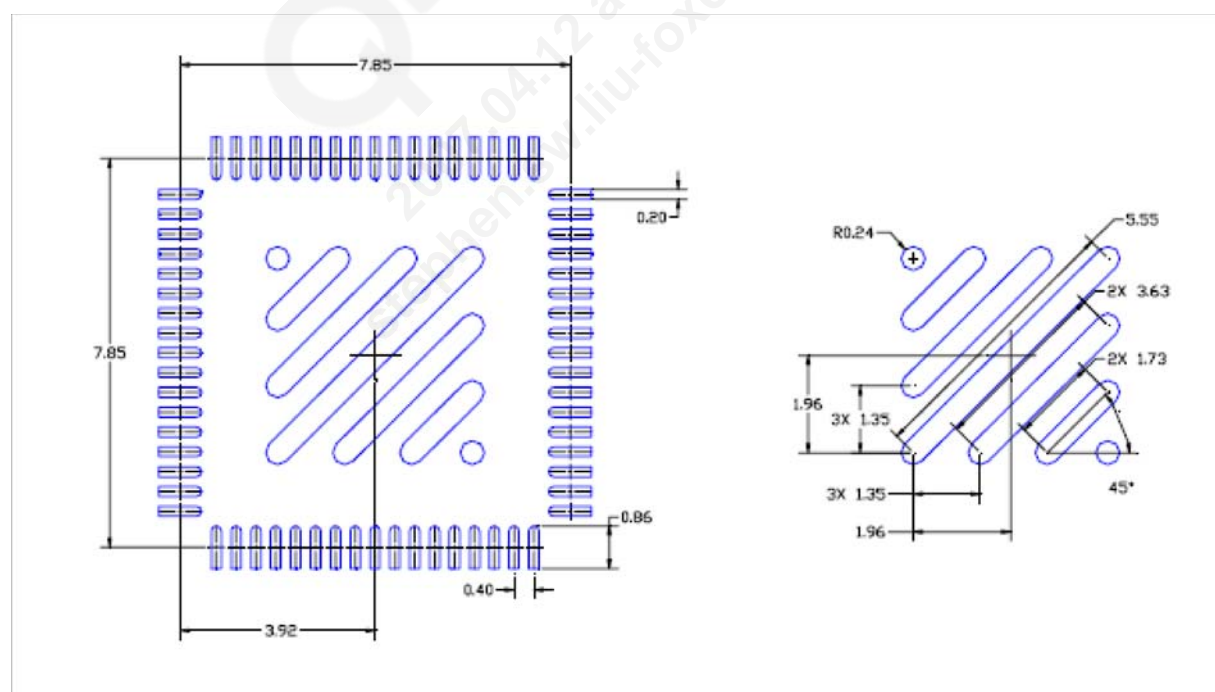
68 mQFN stencil pattern drawing with 100 μm stencil thickness
